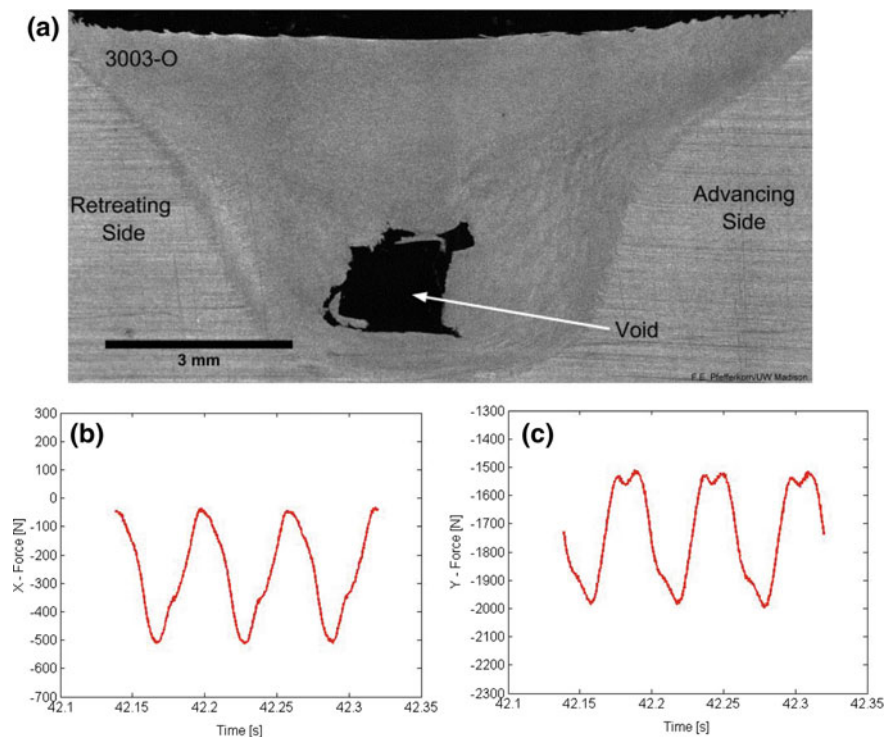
Results of weld at 1,000 rpm and 600 mm/min in alloy 3003-O: a cross section of weld, b force signal perpendicular to welding direction, c force signal in direction of welding
